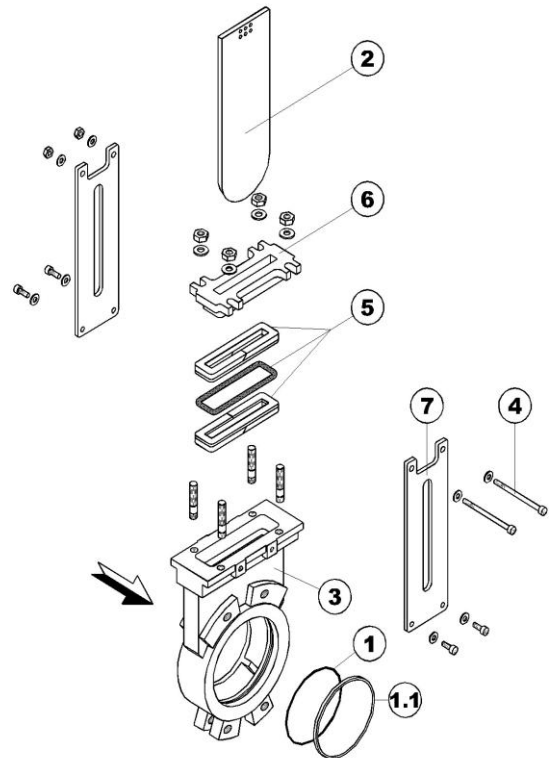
Exploded view of KGV MU-SERIES semi lugged with metallic ring (metal-metal seat)
